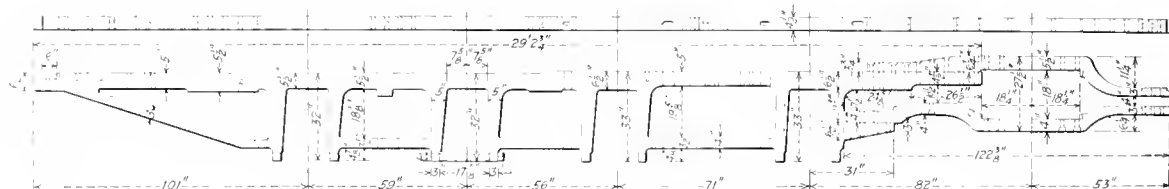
The Frames of the Twelve-Wheel Locomotive Before Conversion
